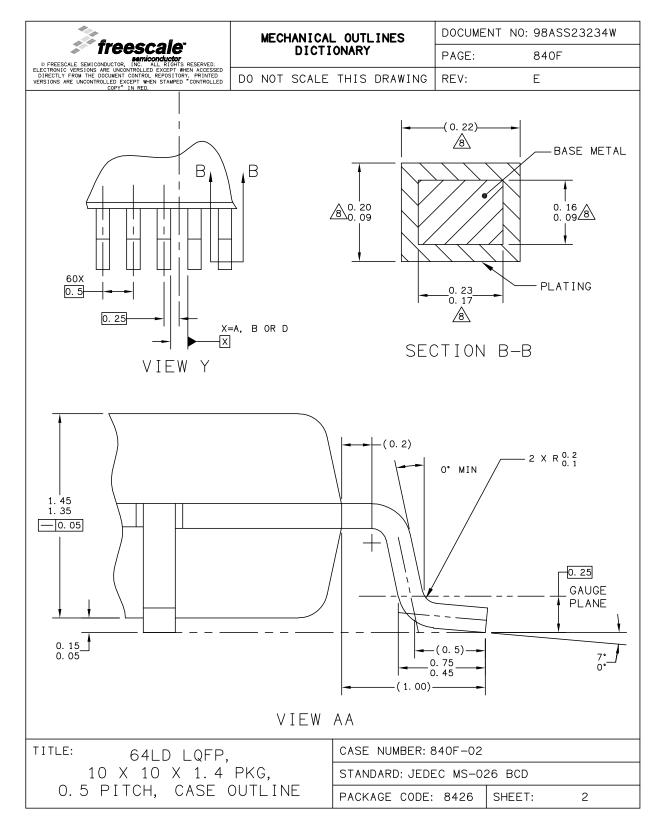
64 LQFP package mechanical drawing (1 of 3)
